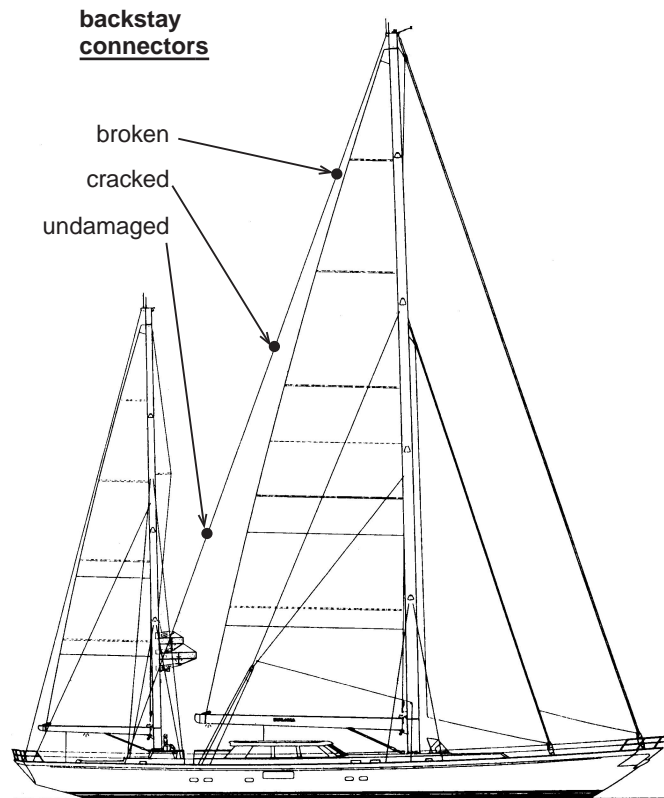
Schematic of the backstay failure: mainmast is 49 m above waterline
